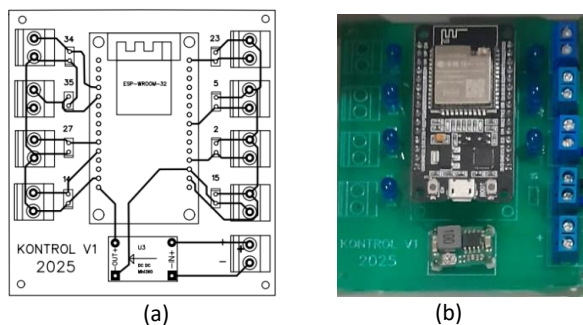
Layout of PCB: (a) PCB design and (b) fabrication
